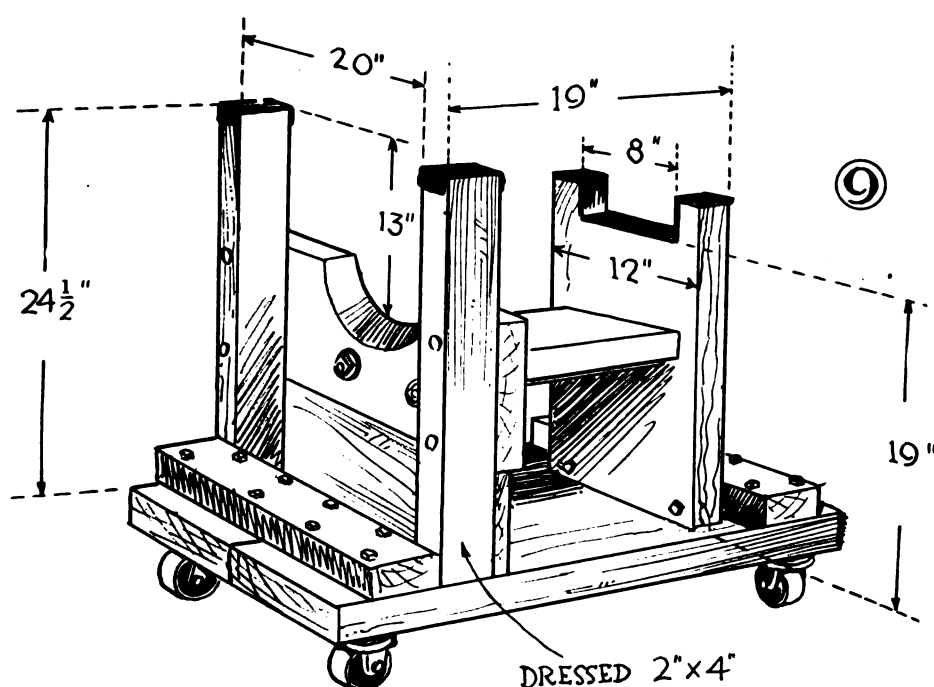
Wooden engine stand for holding the assembled engine in its natural position
